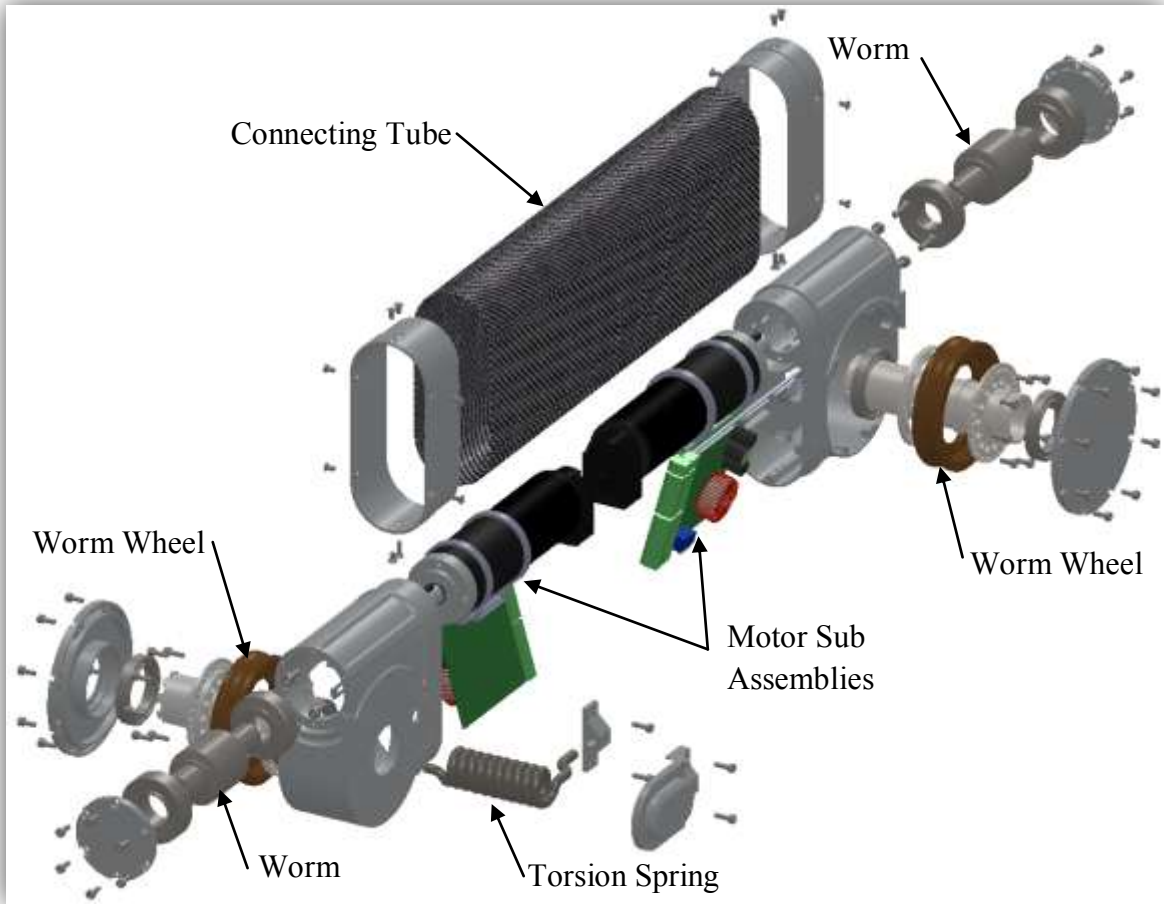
Exploded View of Bottom Section of Manipulator Arm
